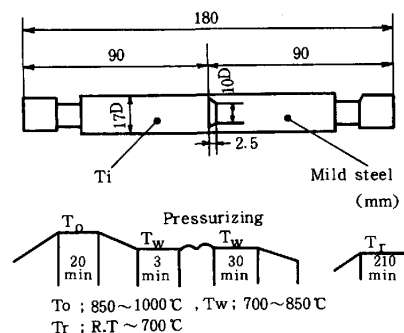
Specimen size and heating cycles in diffusion welding.
